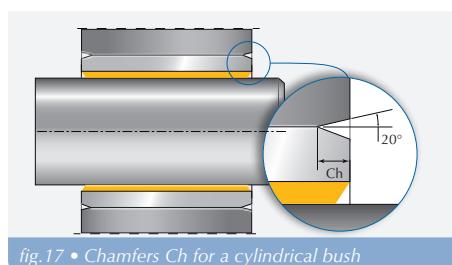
• Chamfers  $Ch$  for a cylindrical bush
